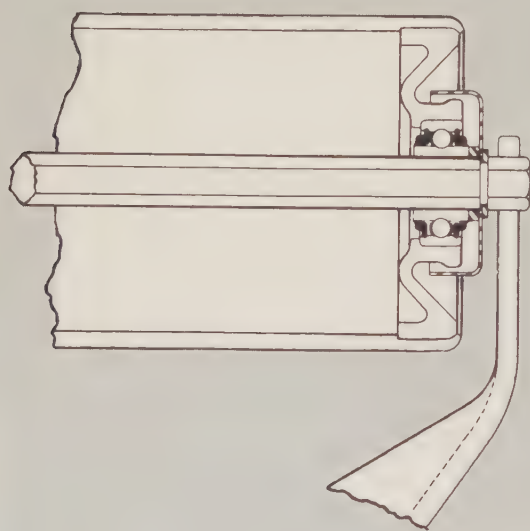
Another special purpose integral seal bearing is represented by this application in a conveyor roller. The bearing has a hexagonal inner ring hole which fits shafting of the same form. Double felt labyrinth seals are provided and this, together with the supplementary deflector shown, affords maximum protection. The simplicity of the design not only enables the conveyor manufacturer to produce the roller economically but also results in units which are extremely easy for the operator to set up and maintain in the field.
